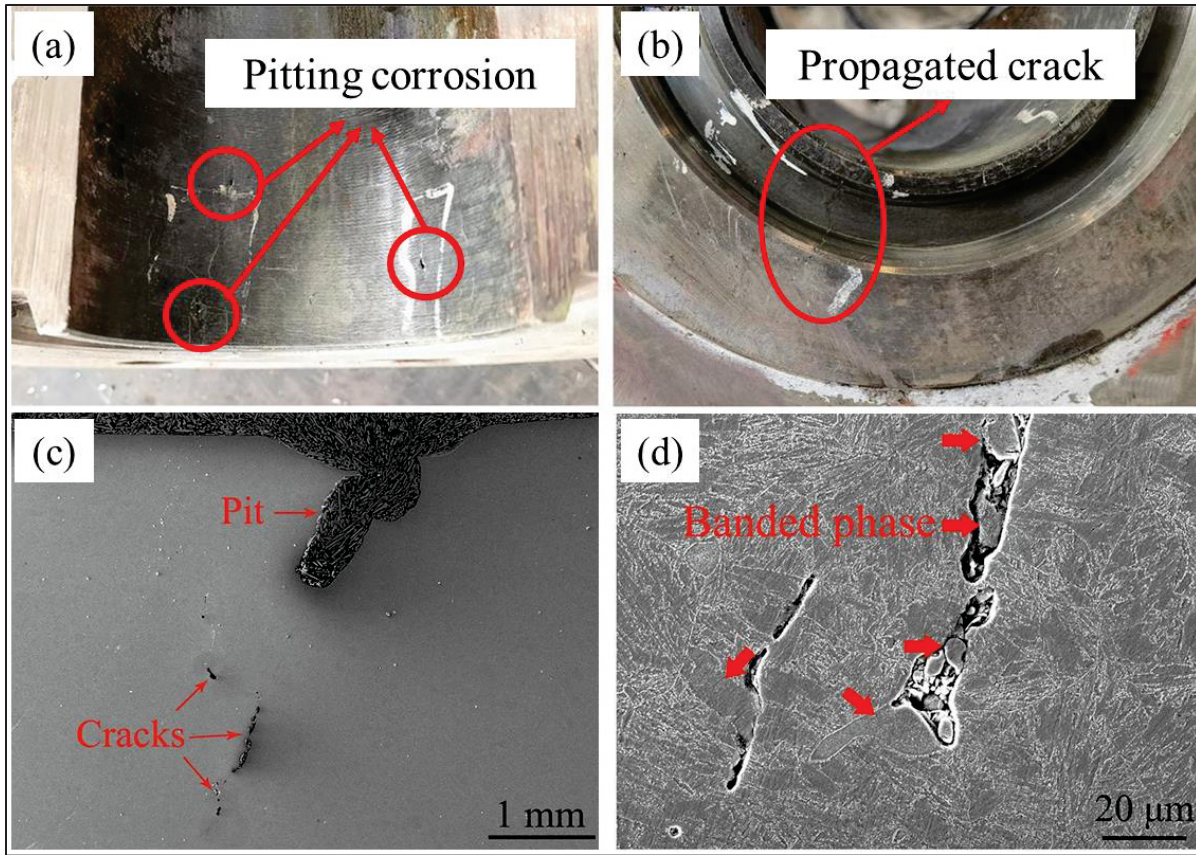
Corrosion and propagation of cracks on the surface of the pipe flange can be observed as follows: (a) pitting corrosion occurring near the flange end on the inner surface; (b) crack propagation originating from the pit located in the ring groove; (c) the detailed cross-sectional morphology of the region affected by pitting and cracking; (d) a closer examination at a higher magnification
